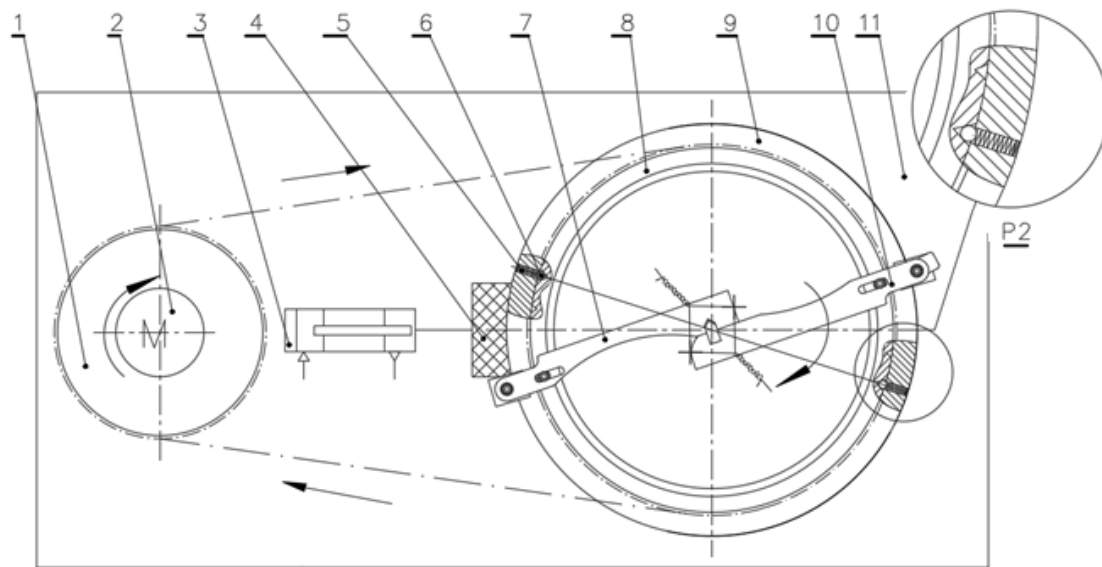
Principle diagram of wire-twisting mechanism in the wire-twisting mode
